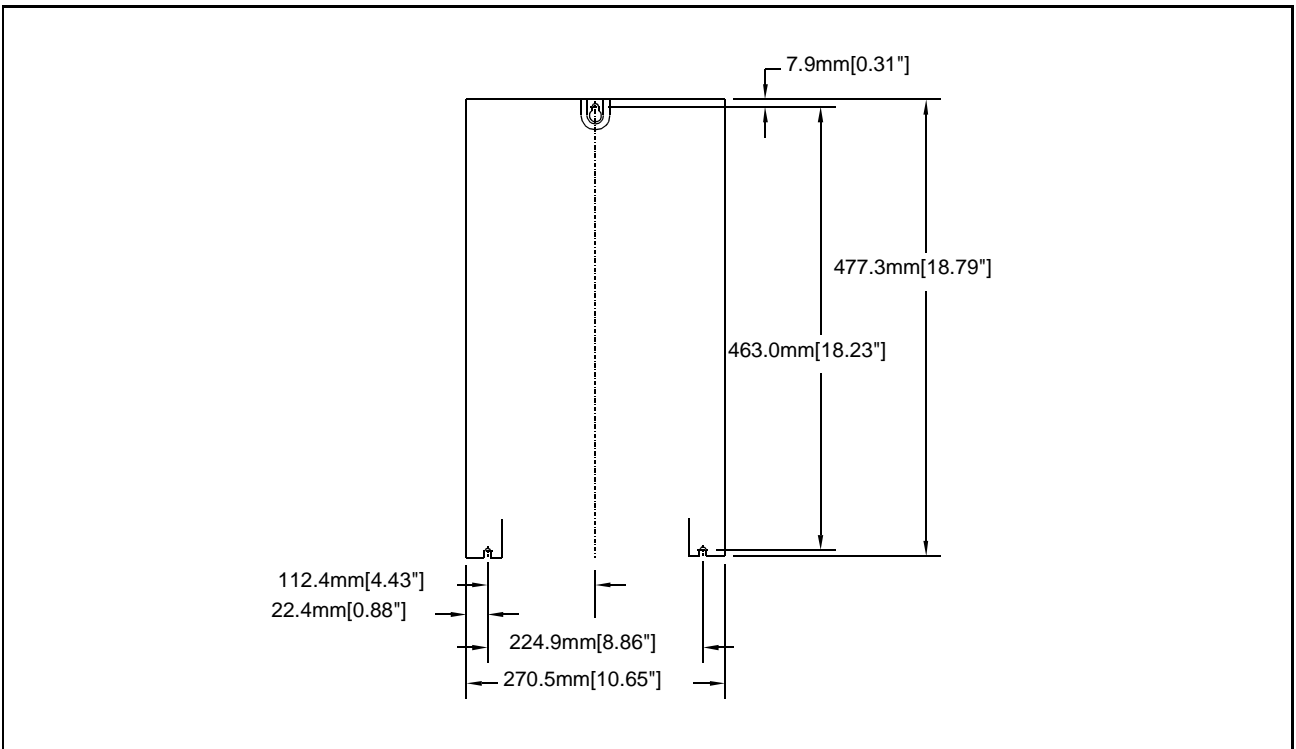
1.5 HP to 30 HP @ 230 VAC / 3 HP to 60 HP @ 460 VAC Drive Mounting Hole Pattern
